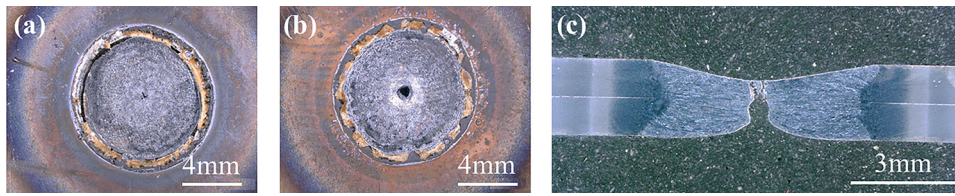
Typical weld morphology with the welding parameters of sample 6 in Table 2: (a) top view of the weld; (b) bottom view of the weld; (c) cross-sectional view of the weld.
